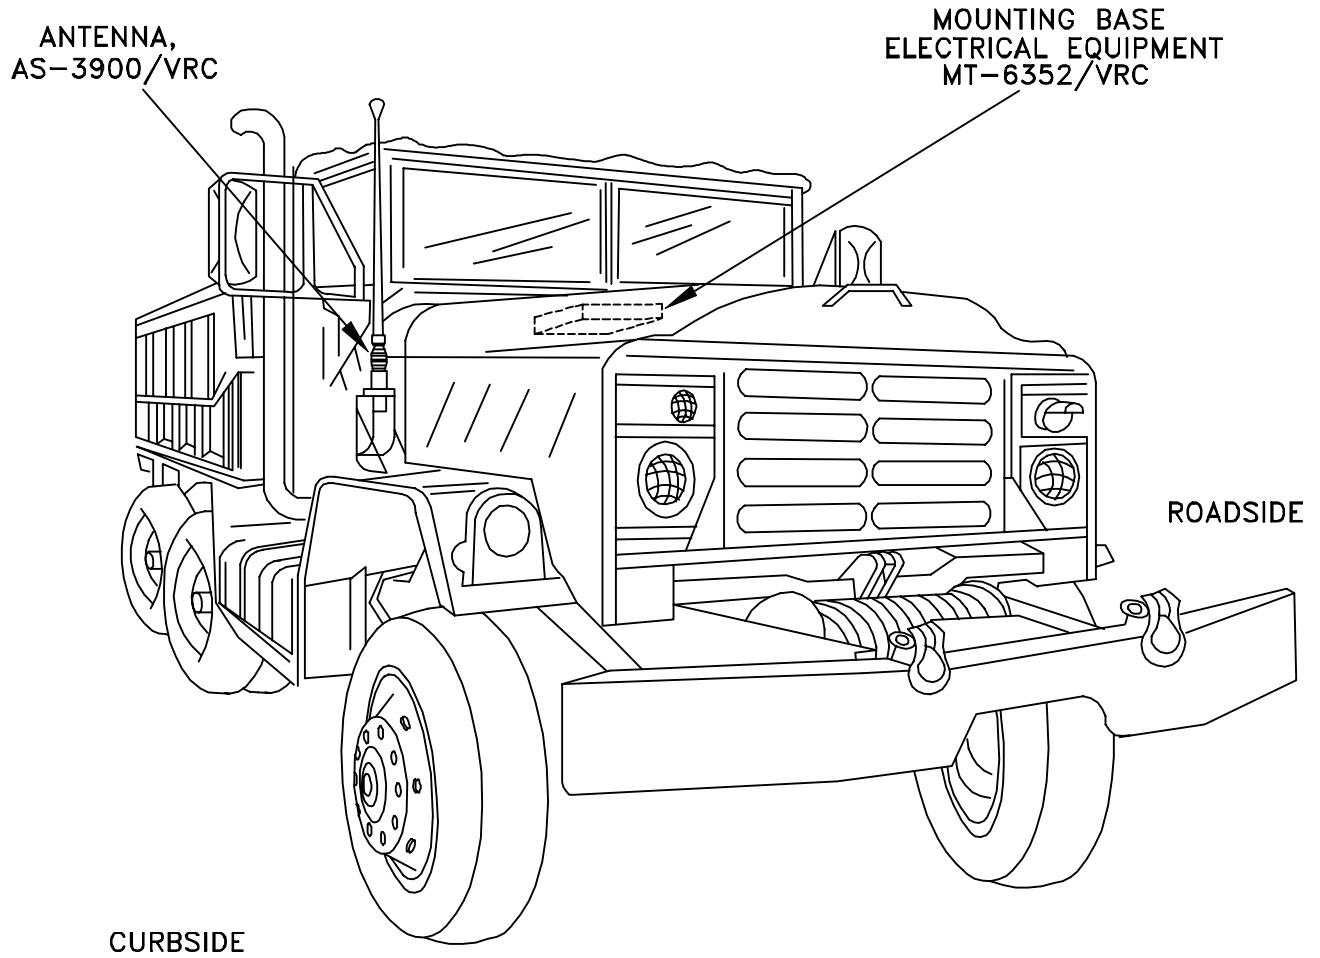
(1). MK and Radio Installation: MK Equipment Locations
